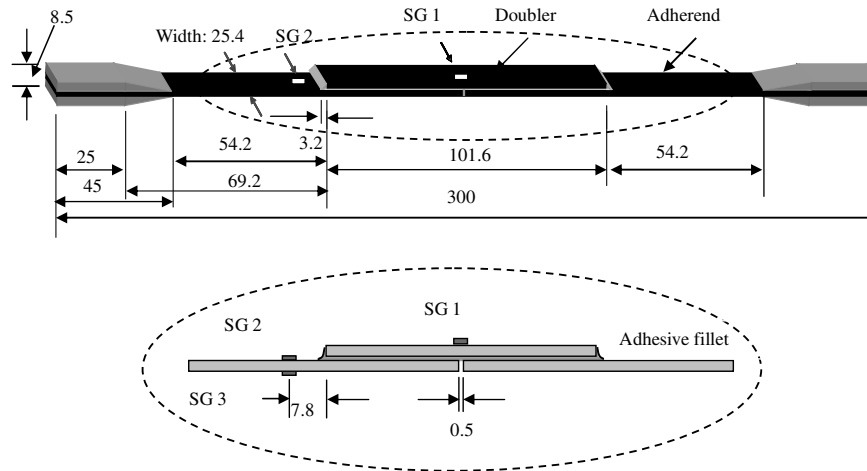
The bonded composite single-strap butt joint specimen design and three strain gauge (SG) positions (all dimensions in mm).
